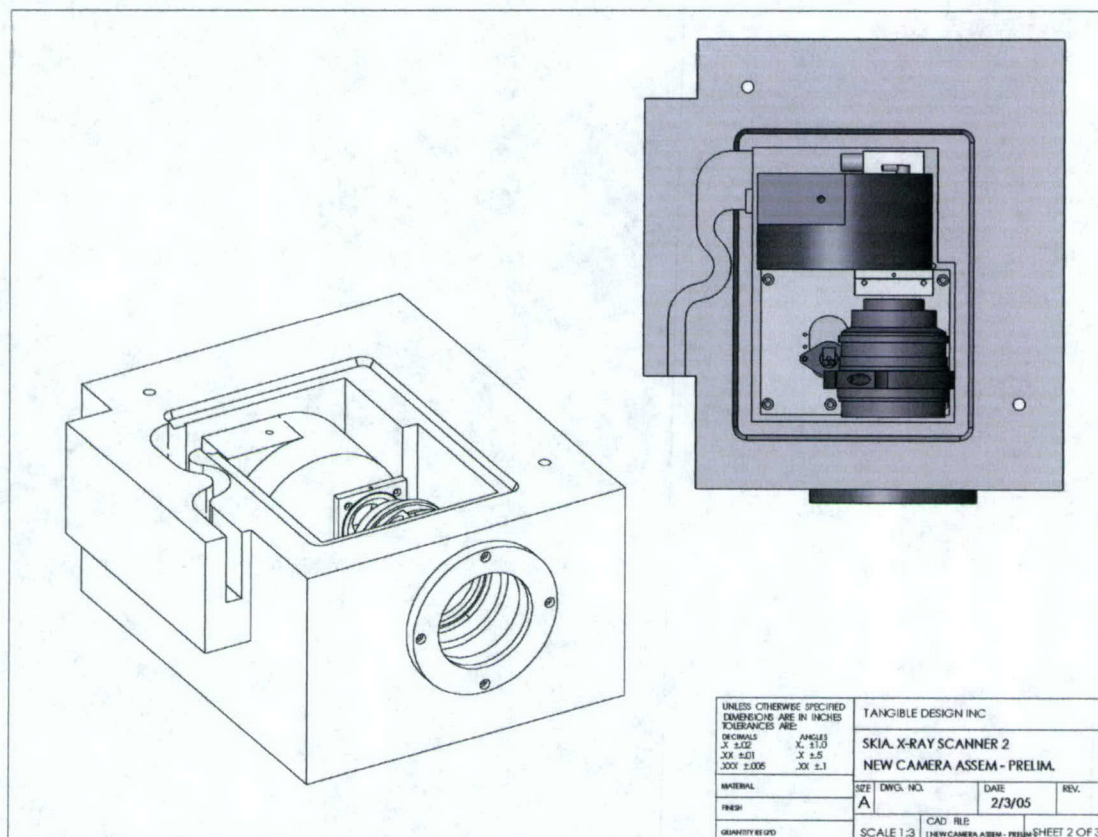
The leaded box shielding assembly that protects the CCD and optics from scattered x-rays. This was the actual as-built configuration for our test camera.
